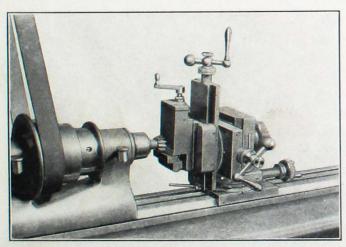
Milling Attachment with Vise set as plain miller for milling dovetail.
